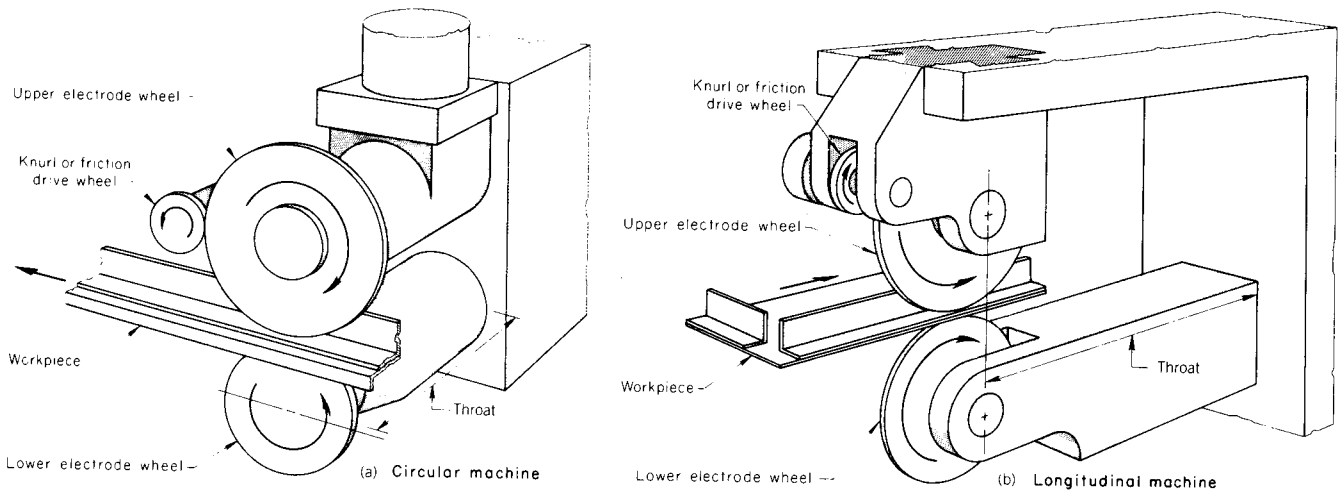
Position of electrode wheels relative to throat on resistance seam welding machines
